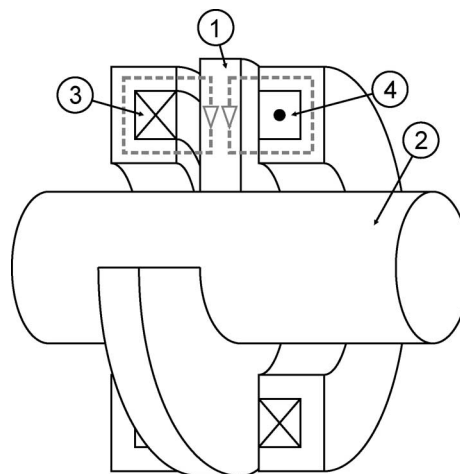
Functional principle of a state-of-the-art thrust disk axial magnetic bearing. A thrust disk (1) is fixed upon a rotor (2). Coils (3) and (4) are used to modulate the air gap flux to cause the desired axial forces.
